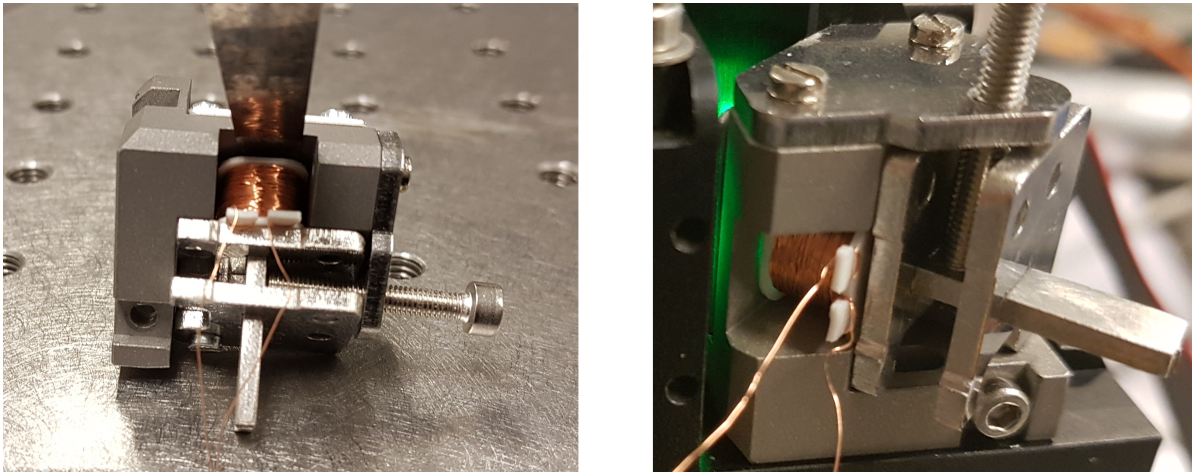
Left: Setting coil yoke position with feeler gauge. Right: Fully assembled HF scanner mounted in the OPMOD of the EasyScan
